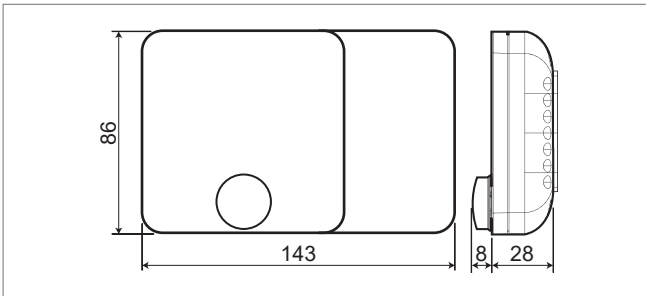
Dimensional drawing for the zone operator terminal for surface mounting (dimensions in mm)
